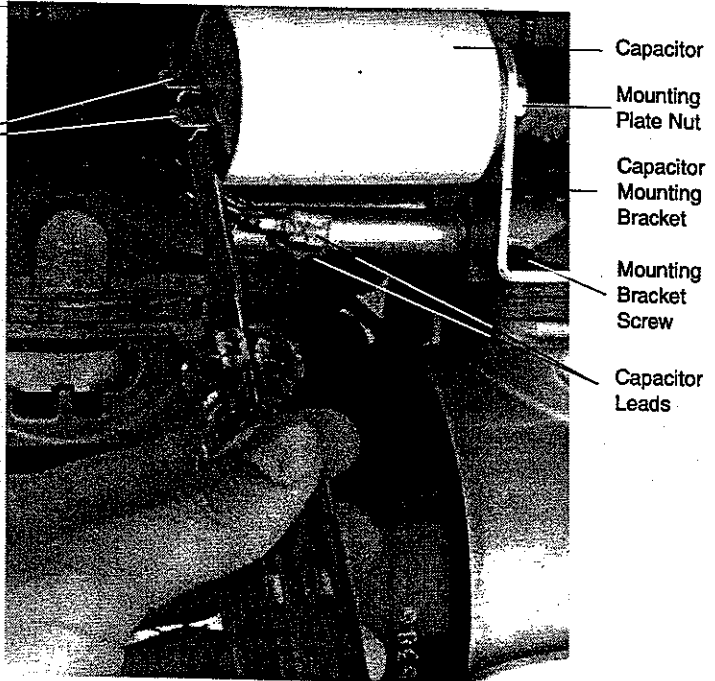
Discharging Capacitor for Removal of Compressor Assembly
